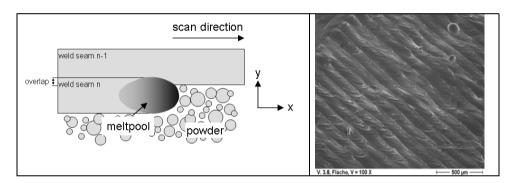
Schematic drawing of weld seams and melt pool (left), top surface of a part after melting (right)
